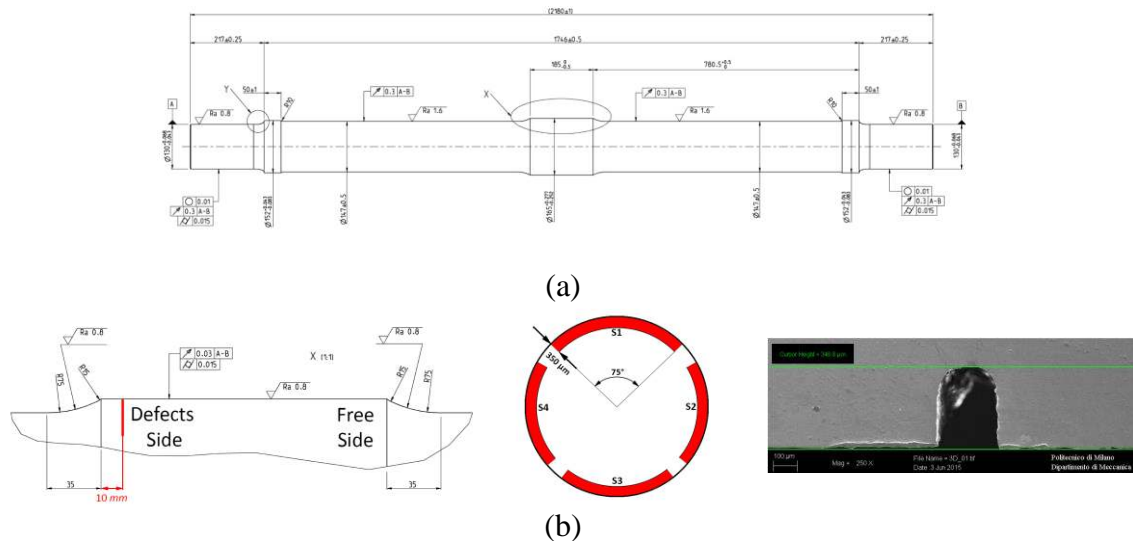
Full-scale specimen: a) technical drawing; b) artificial defects located under the press-fit.
